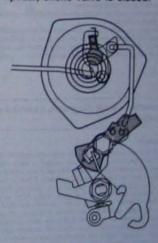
Choke system and fast idle cams - Aisan carburettor (Sec 10)
